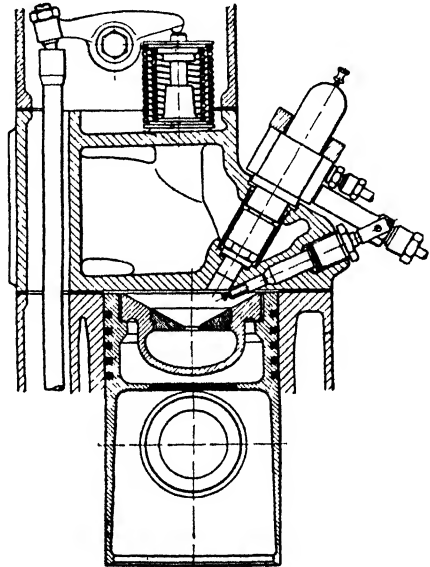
The Bosch Acro Internal-Type Pre-combustion Chamber.
